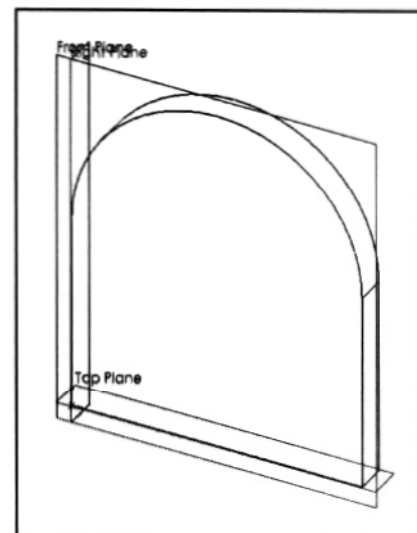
The base feature completed using a "blind" extrusion in -Z to a depth of 20 (mm).
